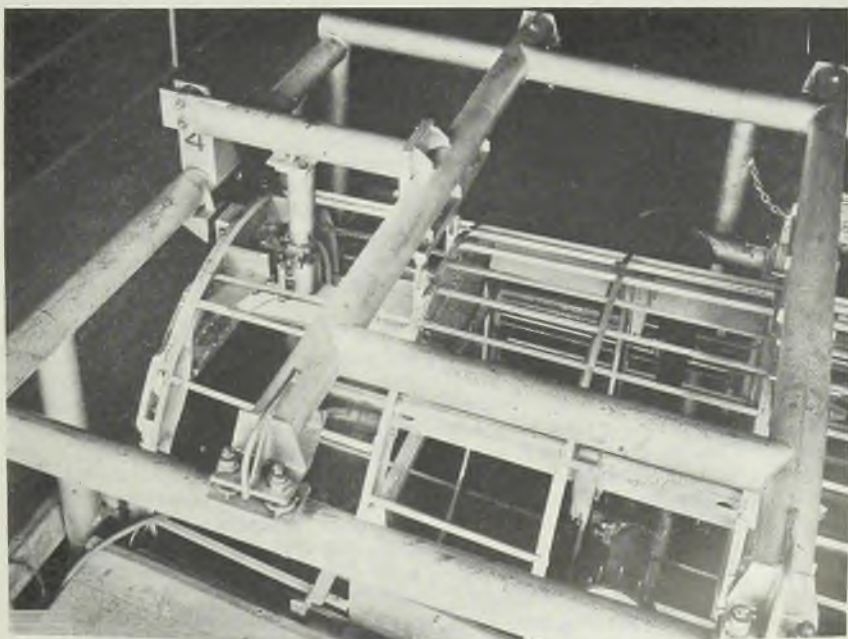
A major assembly jig, illustrating application of spherical bushings which reduce machining
